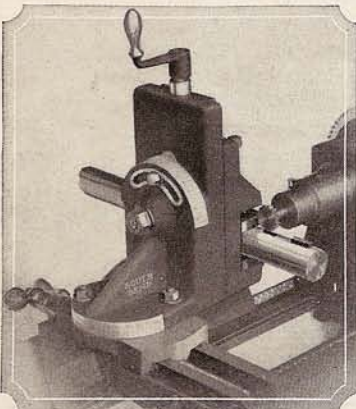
Cutting a Woodruff Key-seat with Milling Attachment
